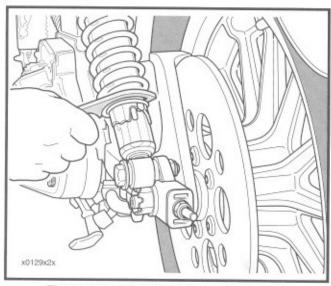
Adjust Shock Absorber Spring Adjusting Cams
